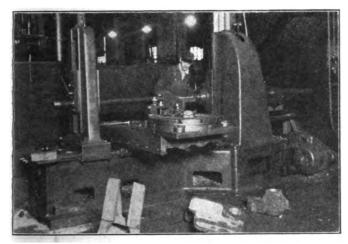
Machining Driver Brake Fulcrum Castings on a Lucas No. 32 Horizontal Boring Machine
